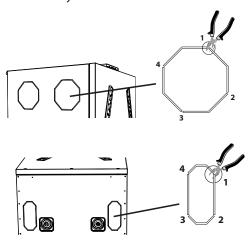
Opening the air duct connections: side connection (top figure) and bottom connection (bottom figure)
